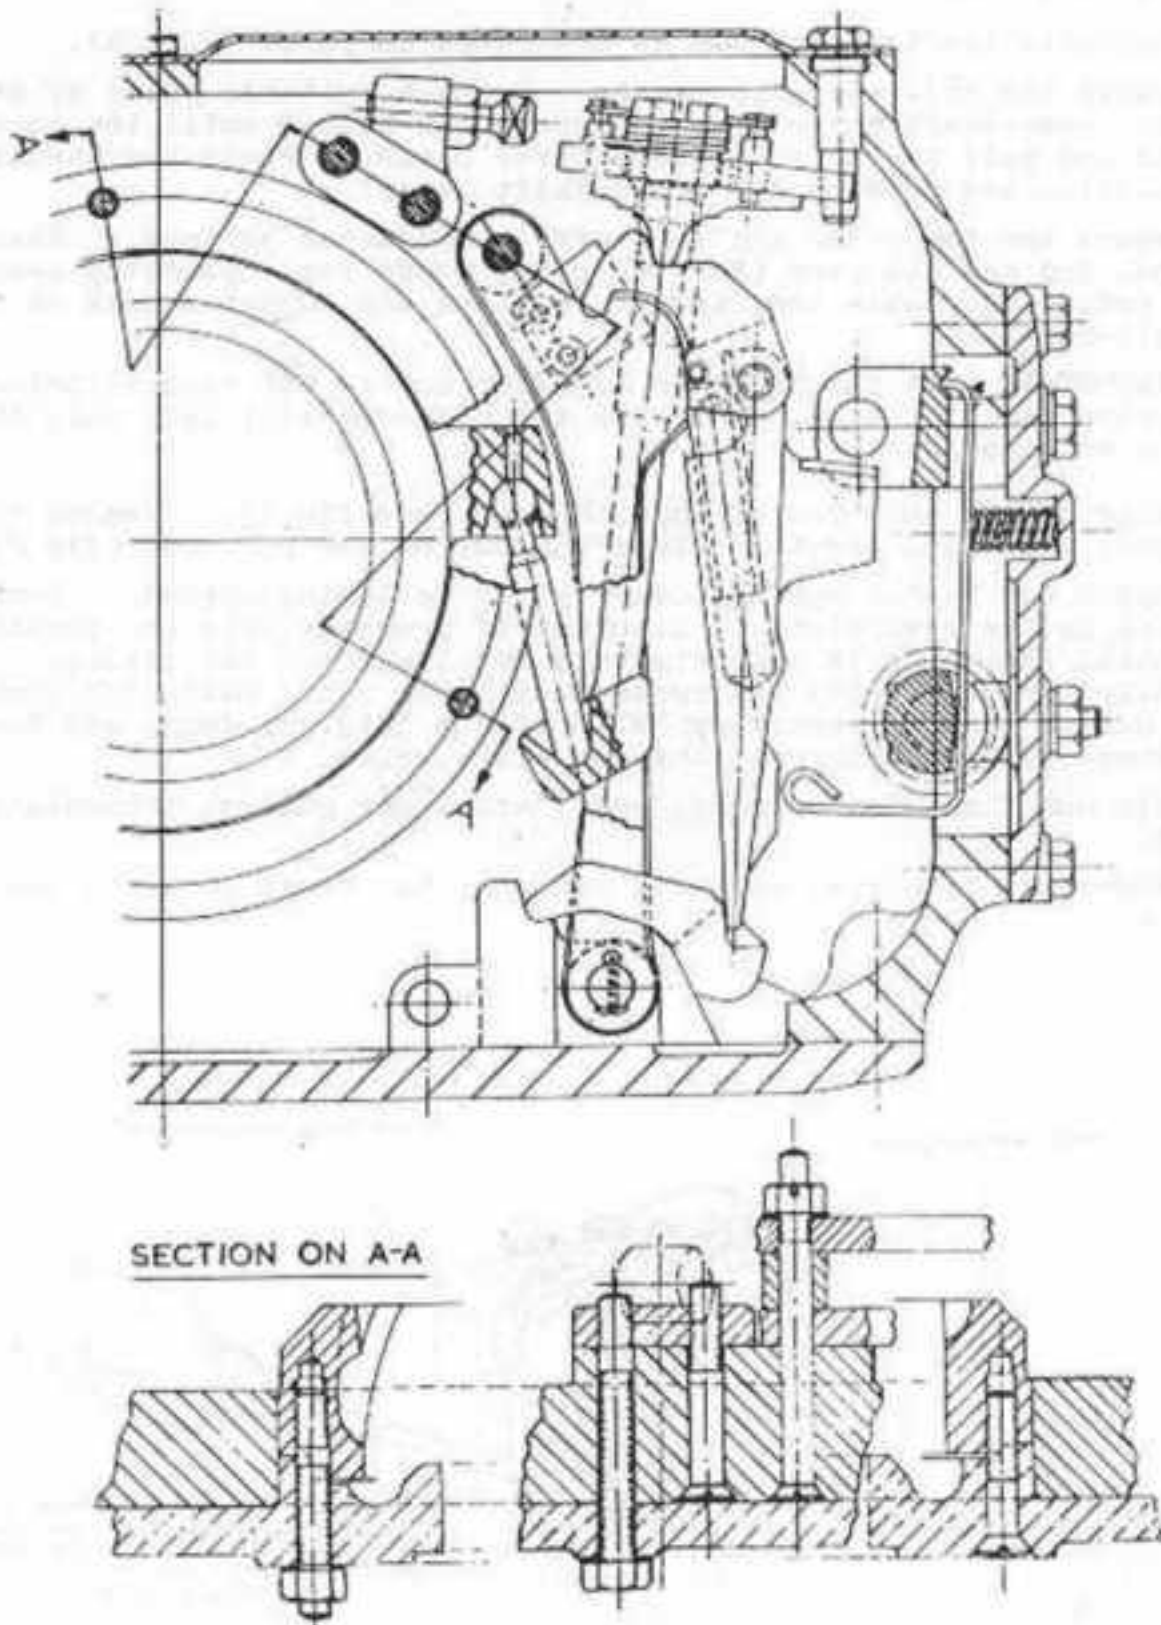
GEARBOX - GENERAL ARRANGEMENT OF CLUTCH OPERATING GEAR ON THE 5TH SPEED (TOP)
